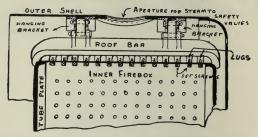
FIRE BOX ROOF BARS-GIRDER PATTERN.
